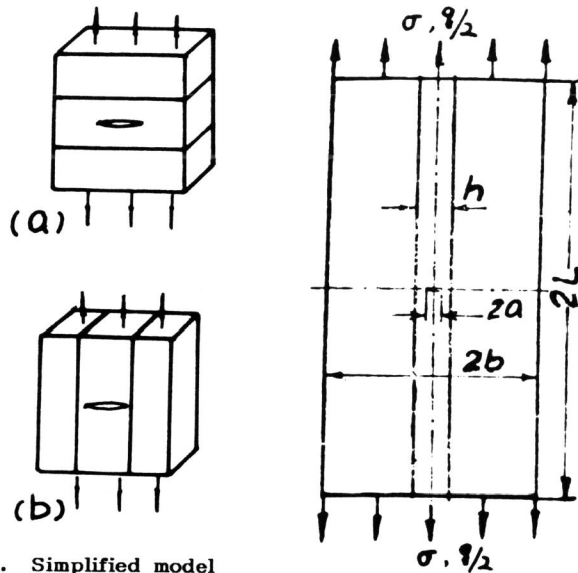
Simplified model of welded joints containing a crack. (a) Parallel crack; (b) Perpendicular crack.
